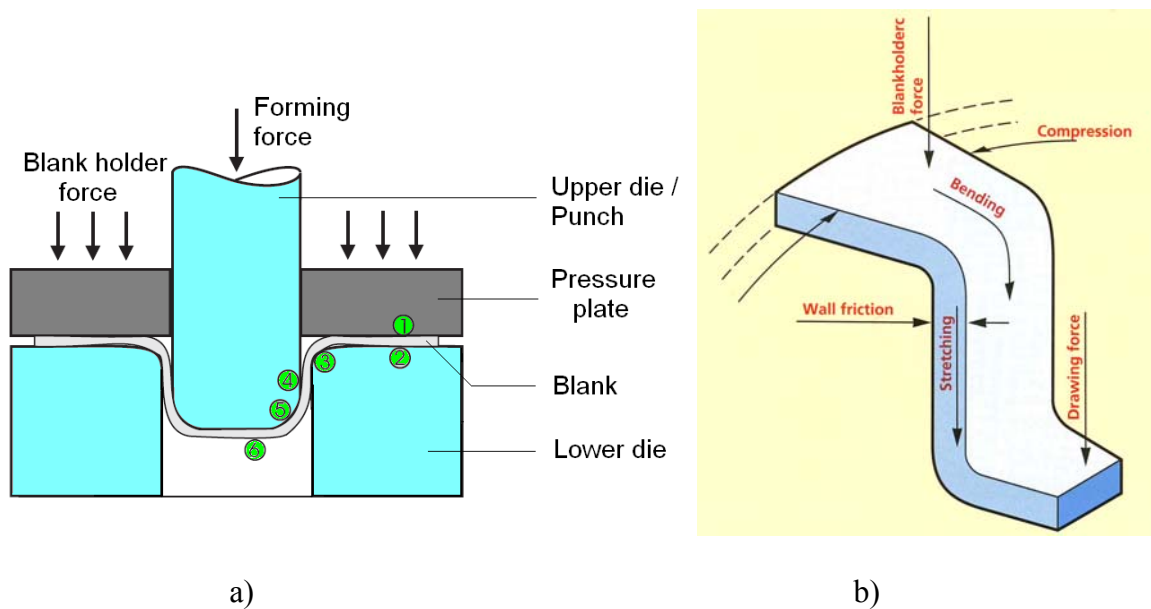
a) Description of typical stamping (deep-drawing) operation and different contact mode locations [After Westeneng, 2002], b) Forces acting on sheet blank during deep-drawing [SSAB Sheet Steel Forming Handbook, 1998]
